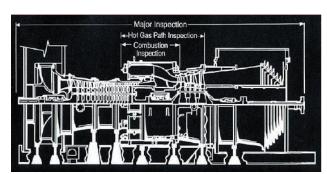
Inspection Types W501D5A Combustion Turbine [1]
